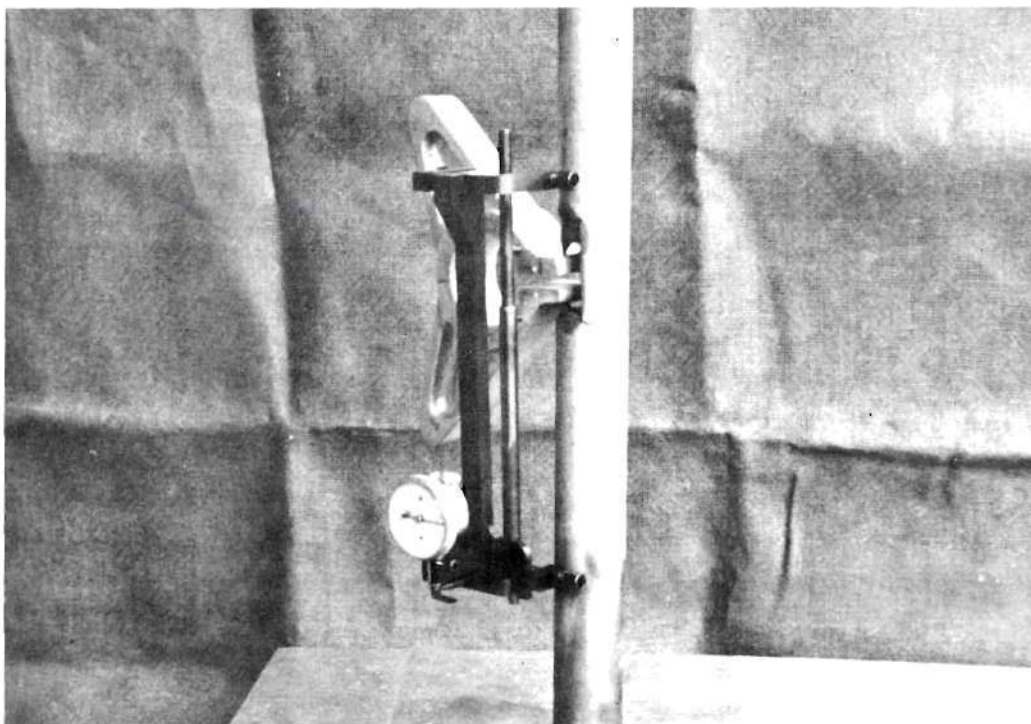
Riehle Extensometer and Extensometer Mount Mounted on Bell Crank.
